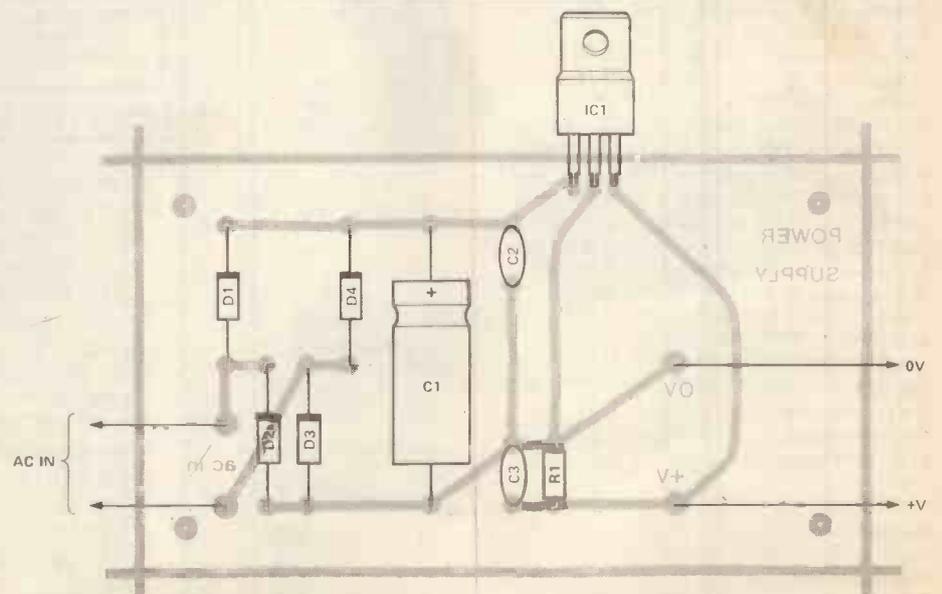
A PCB layout for the supply for the Telephone Timer. The foil pattern is reproduced on the PCB page.
